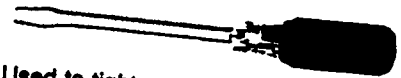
Used to tighten or loosen flathead screws. Be sure slot fits screw head. (Vaco Products Company)
